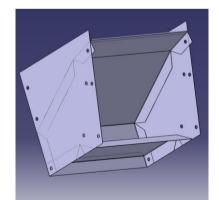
Base module of the concept: individual bucket consisting of four sheet metal parts.
